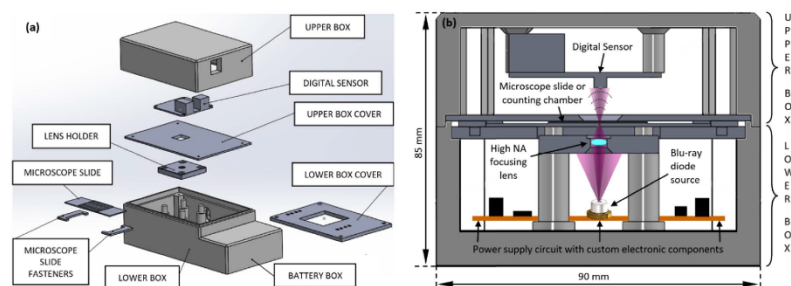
Prototype design. (a) explosion view of the main components and (b) assembly diagram of a central cross-section of the prototype with external dimensions.
